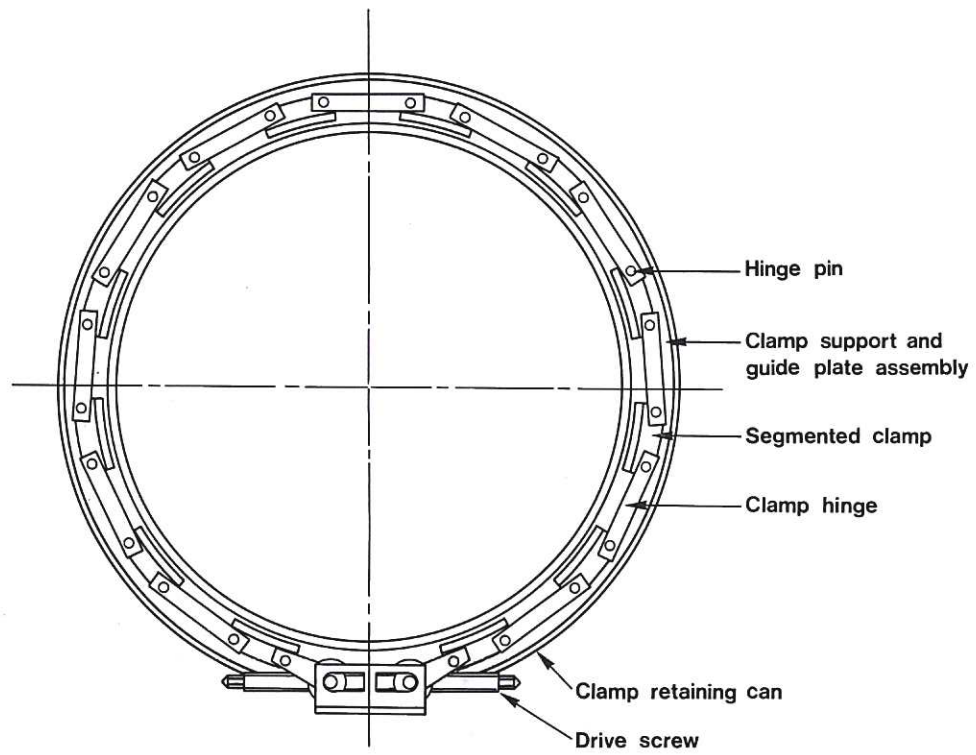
Segmented Clamp Arrangement for use on large diameter pipes.
